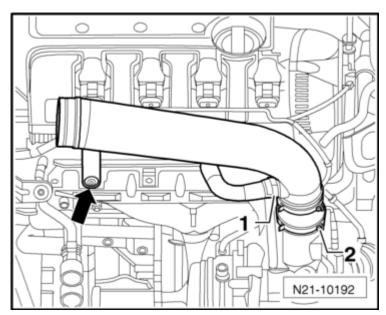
Identifying Charge Air Pipe Bolt -Arrow- And Hose Clamp -2-
